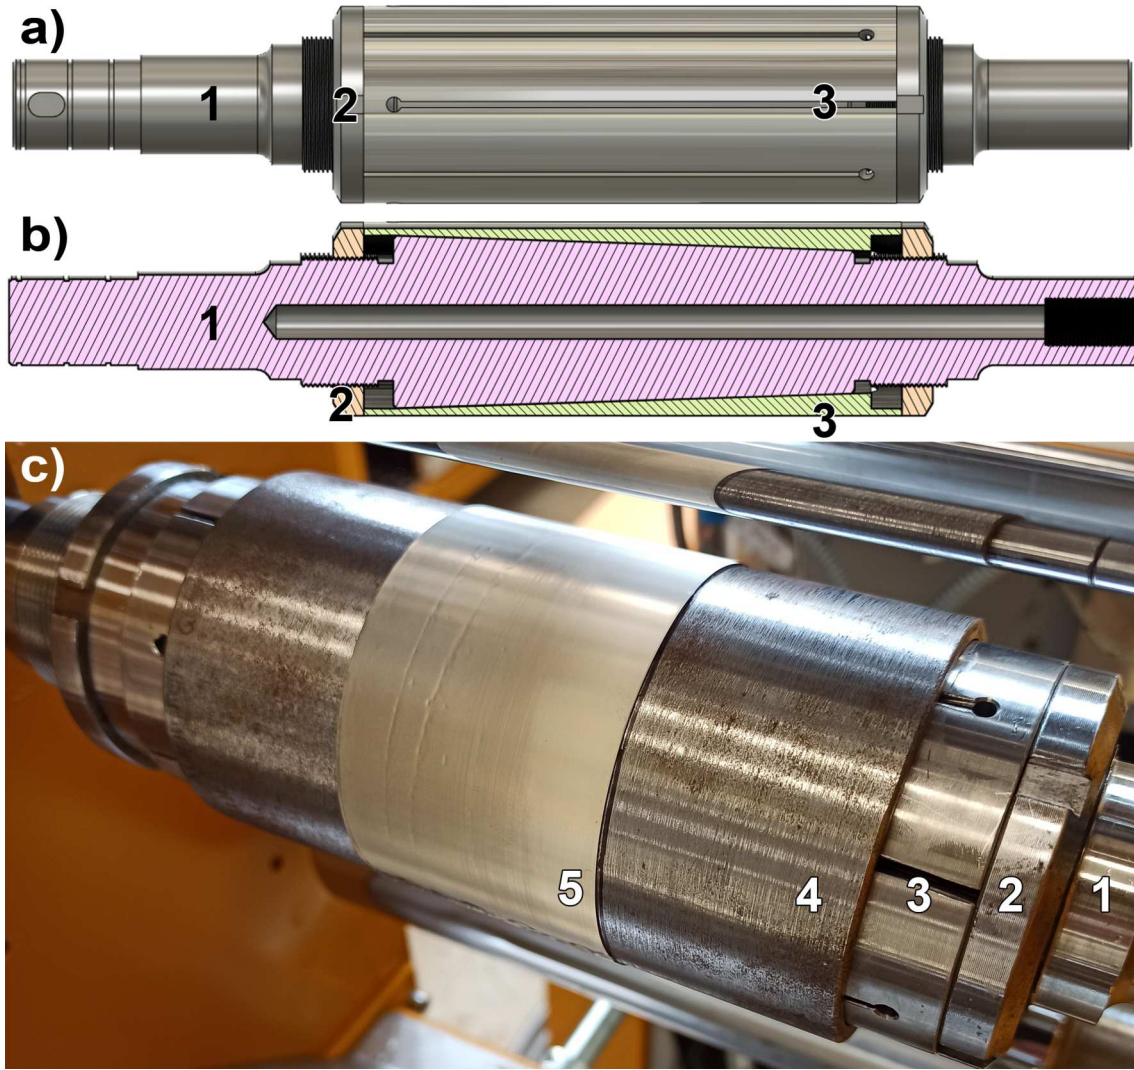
a) Schematic of the expanding roller for attaching welded shims to a roller. b) Section through the roller. c) The expanding roller with a shim attached. The components are: 1) Conical roller core; 2) Tightening nut; 3) Slotted sleeve with conical inside surface; 4) Hollow steel cylinder; 5) Shim welded to steel cylinder.
